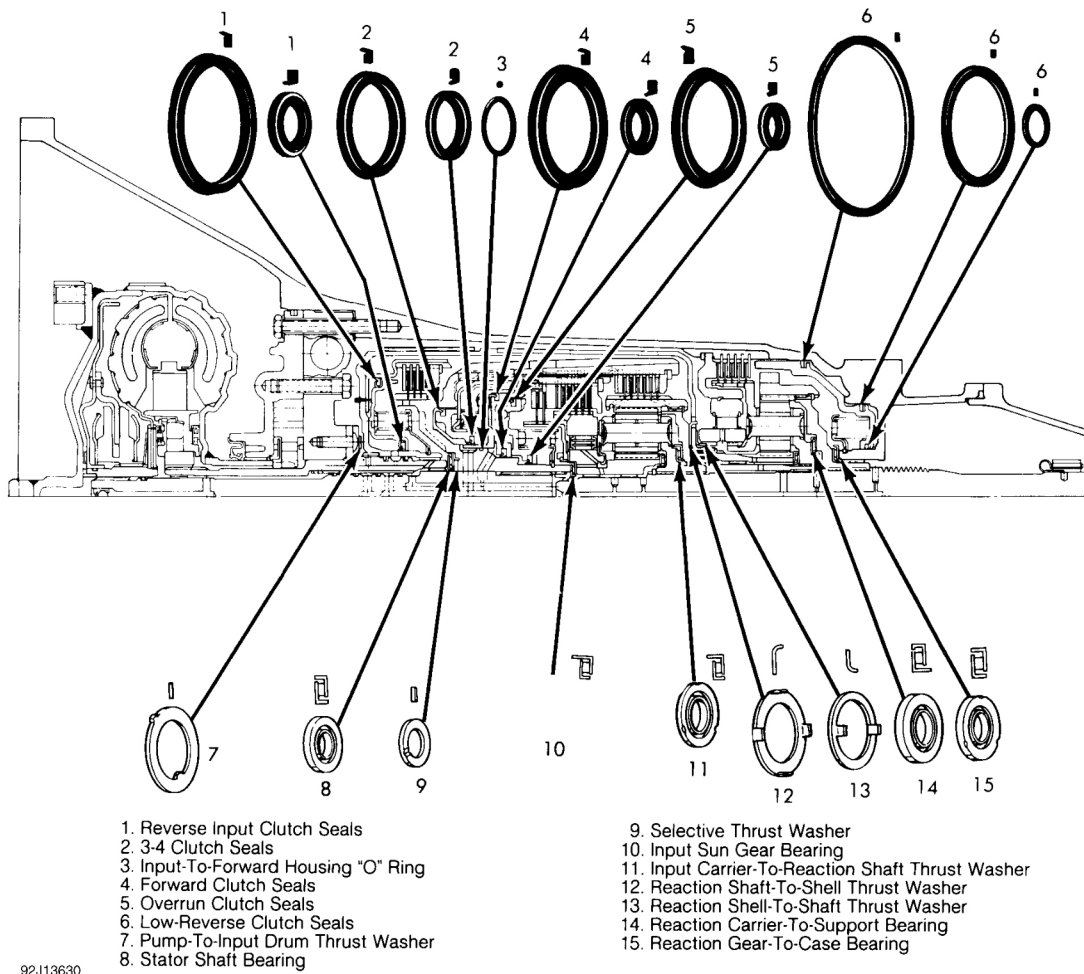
Exploded View Of Seals, Bearings & Thrust Washers
